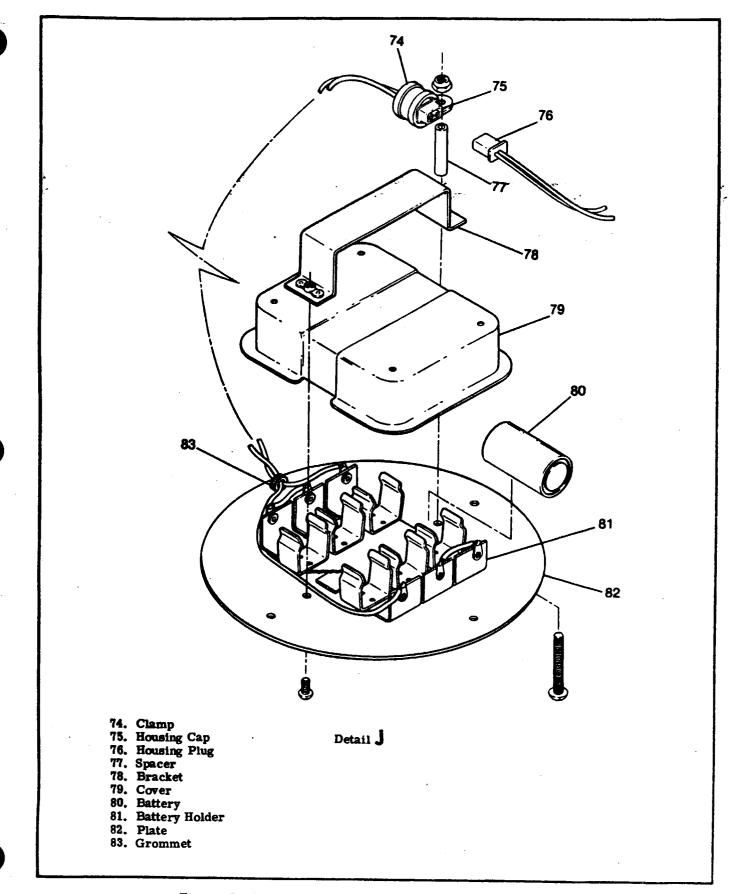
B. Dual Alternator System Installation (Sheet 8 of 8)
